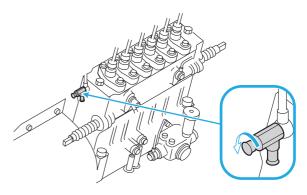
Fuel Injection Pump - Bleed Air 1
